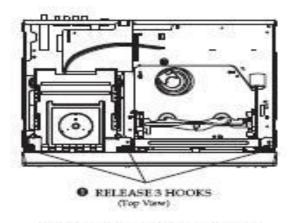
Ass'y Front Panel Removal (Top View)
